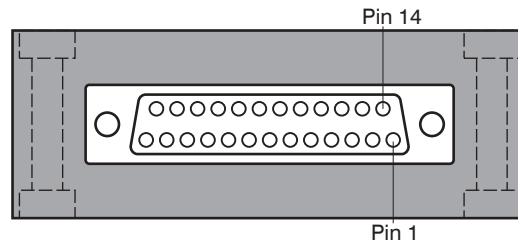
25-pin power supply and output male cable connector, view on solder pin side
